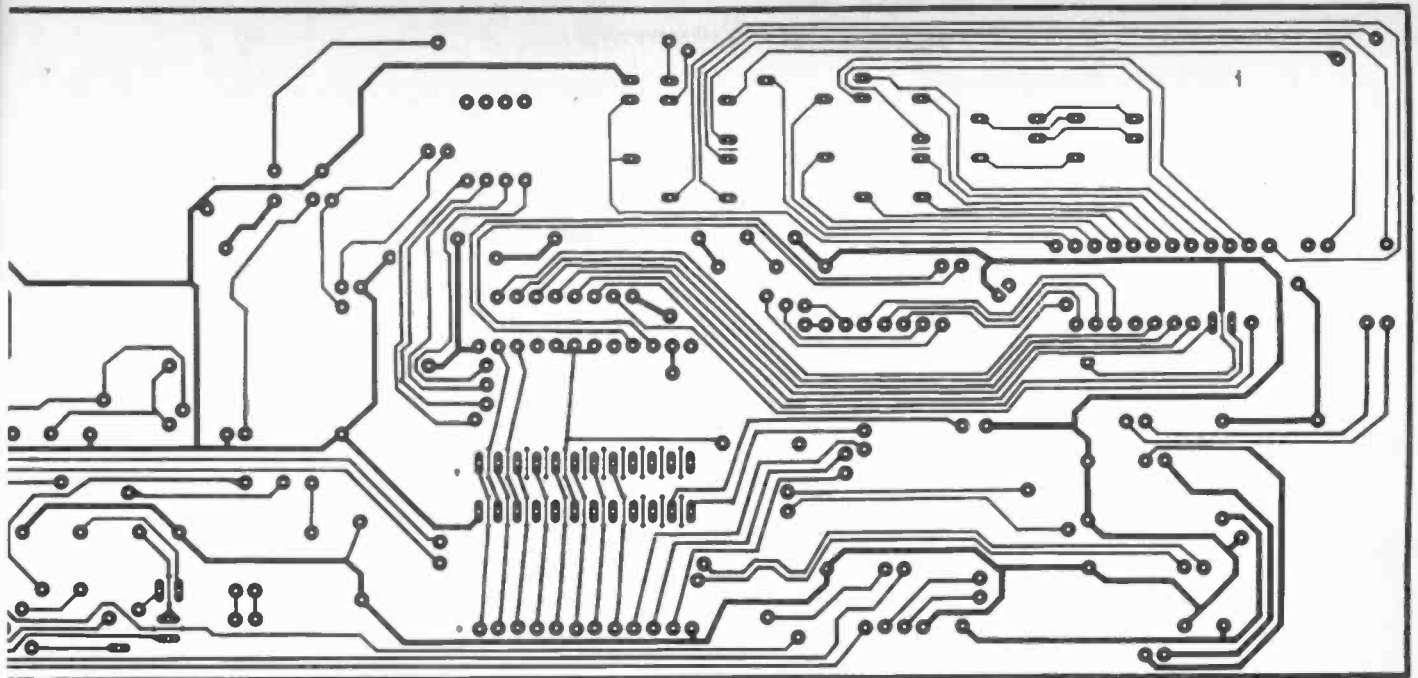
(top). Front panel p.c.b. layout (component side, actual size)
